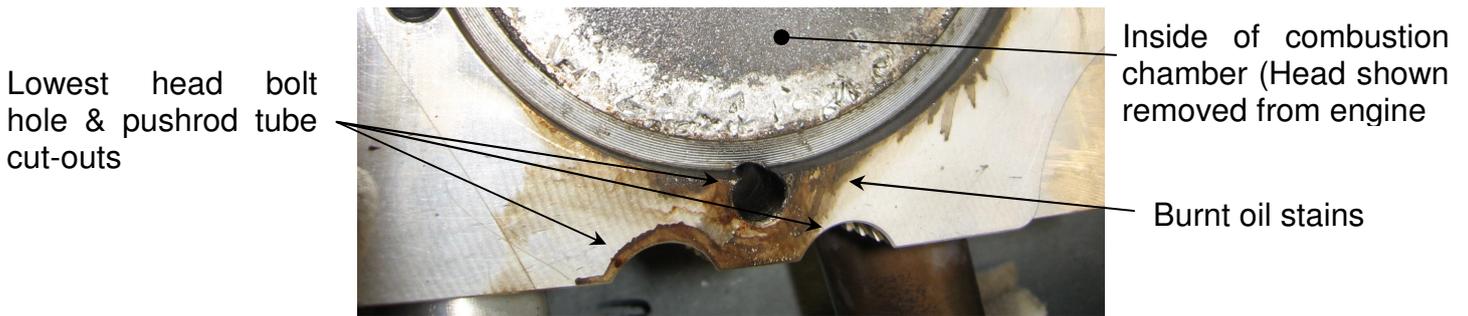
Burnt Oil on Cylinder Head (Indicates leaking head-cylinder seal).
